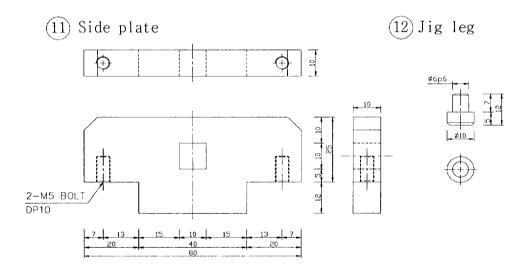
(e) Drawing of side plate and jig leg among jig components
